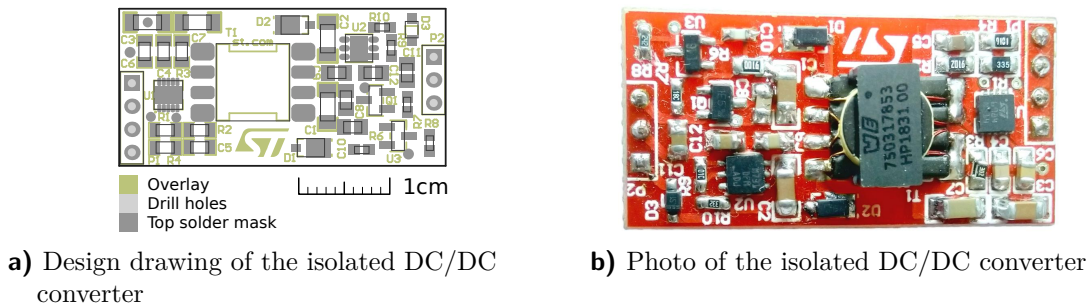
Design drawing and photo of the isolated DC/DC used for powering the gate driver modules
